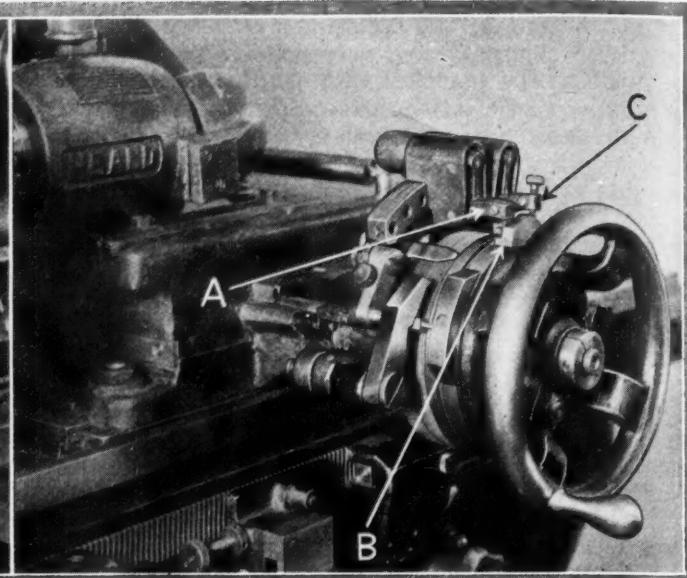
Left hand view of cross slide, showing pawls and arrangement for automatically securing roughing and finishing feed
